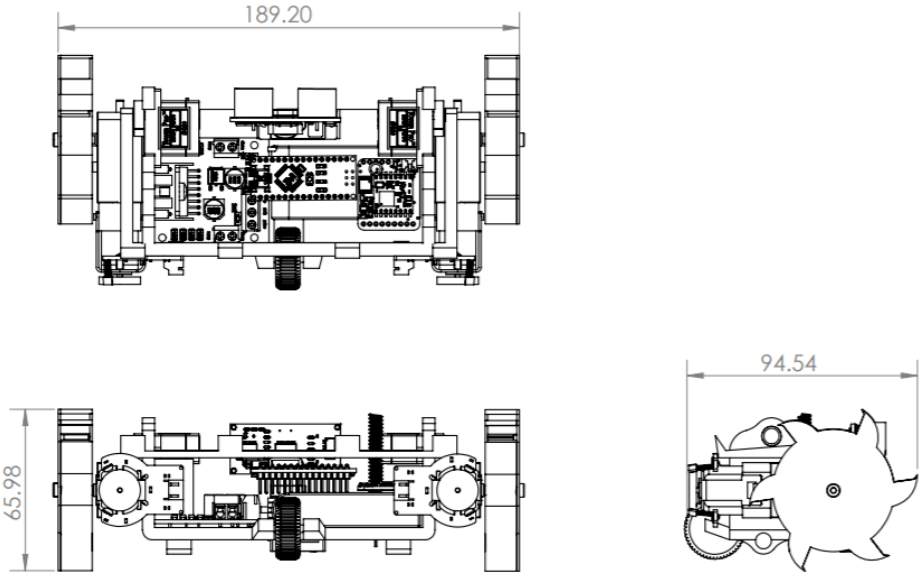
Drawing of the rover showing the maximum dimensions.
